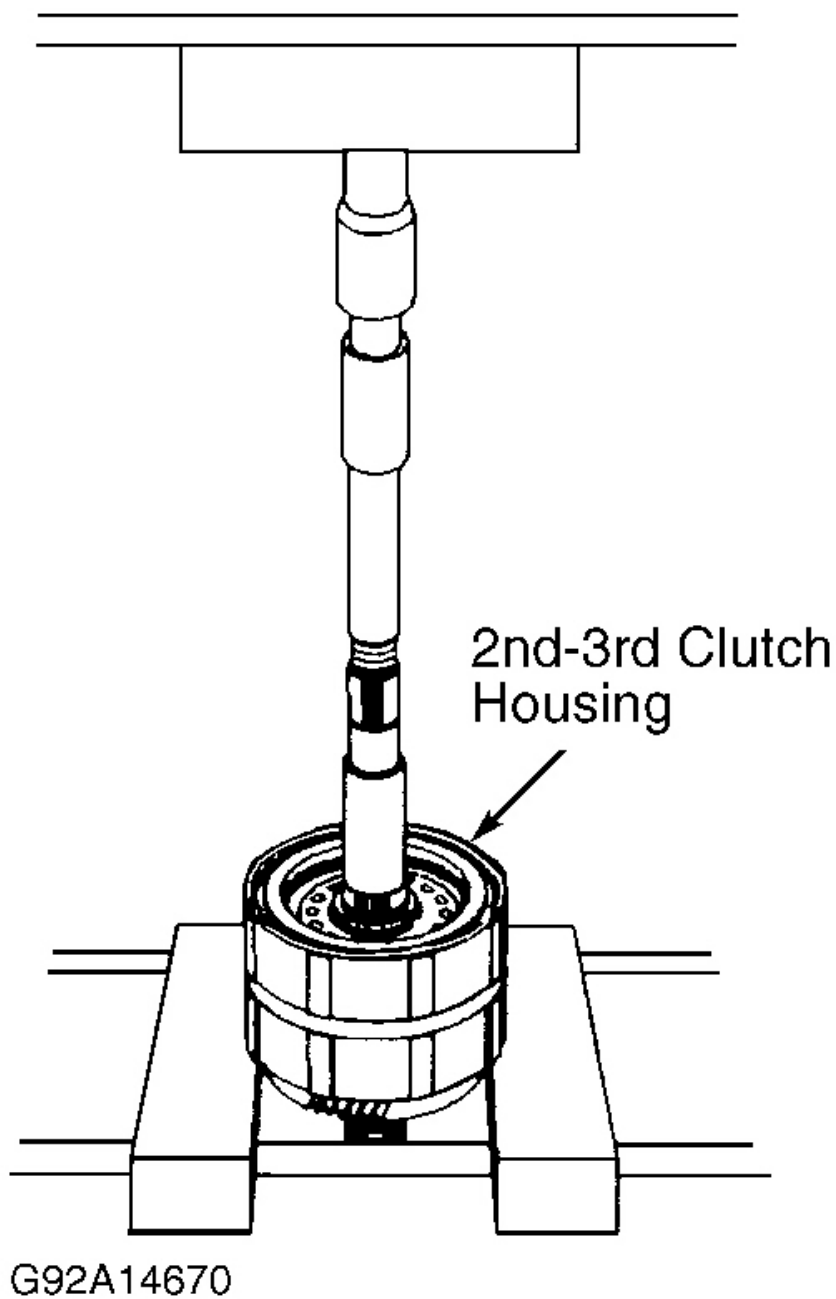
Pressing Off 2nd/3rd Clutch Housing
